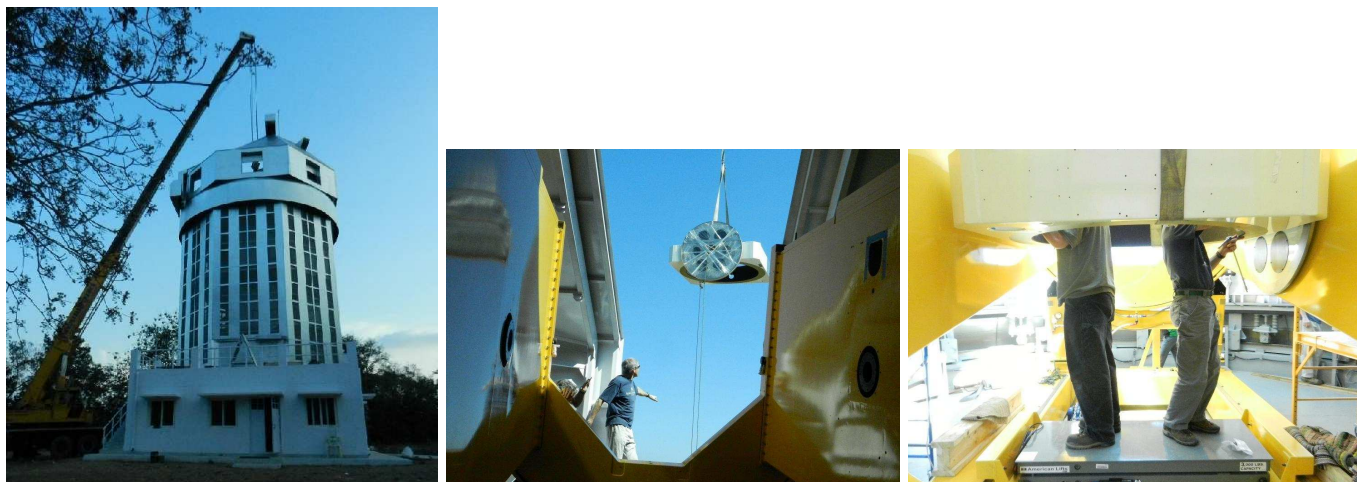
(left) External crane positioned during the structure assembly. (middle) Centre section of the tube assembly being hoisted into dome. The bearing mounts defining the declination axis are seen. (right) Centre section being assembled on the declination bearings. A critical operation with little room to maneuver!
